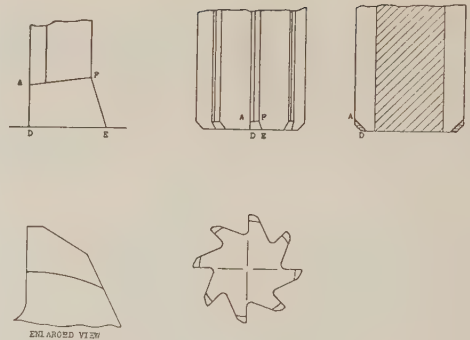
SHARPENING OF REAMER-POINT CUTTING EDGE
